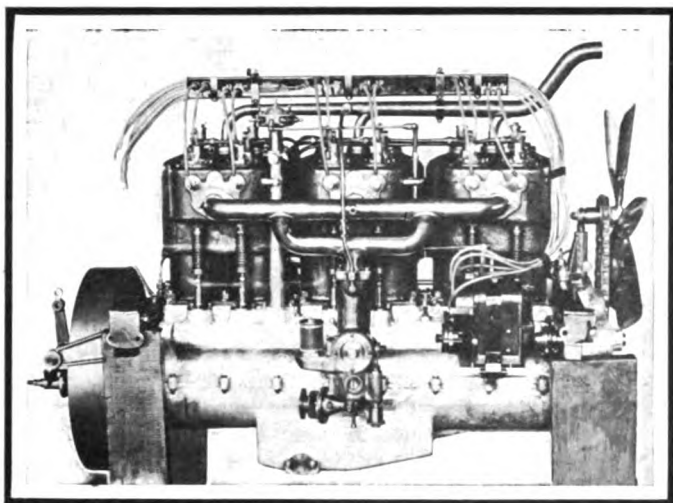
Right side of Pierce motor, showing arrangement of carbureter and magneto
